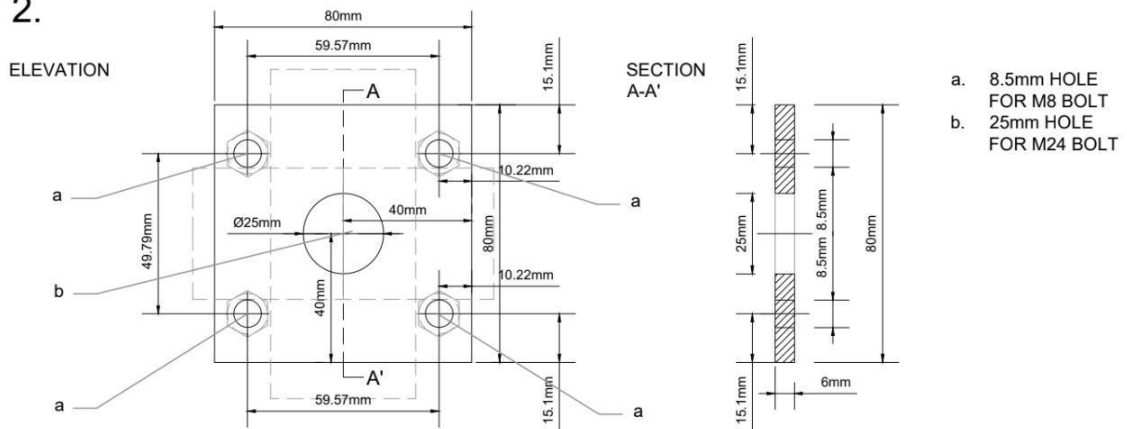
The above are the drawings of the 2 plates which have been cut with the milling machine at the engineering faculty
